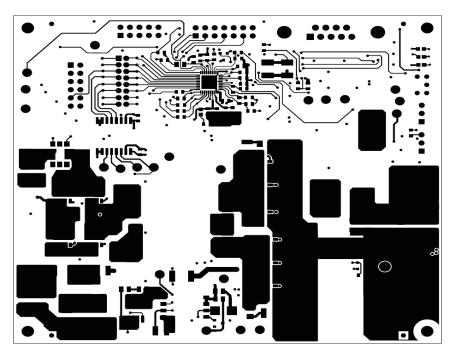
UCD3138HSFBEVM-029 Top Copper (top view)
